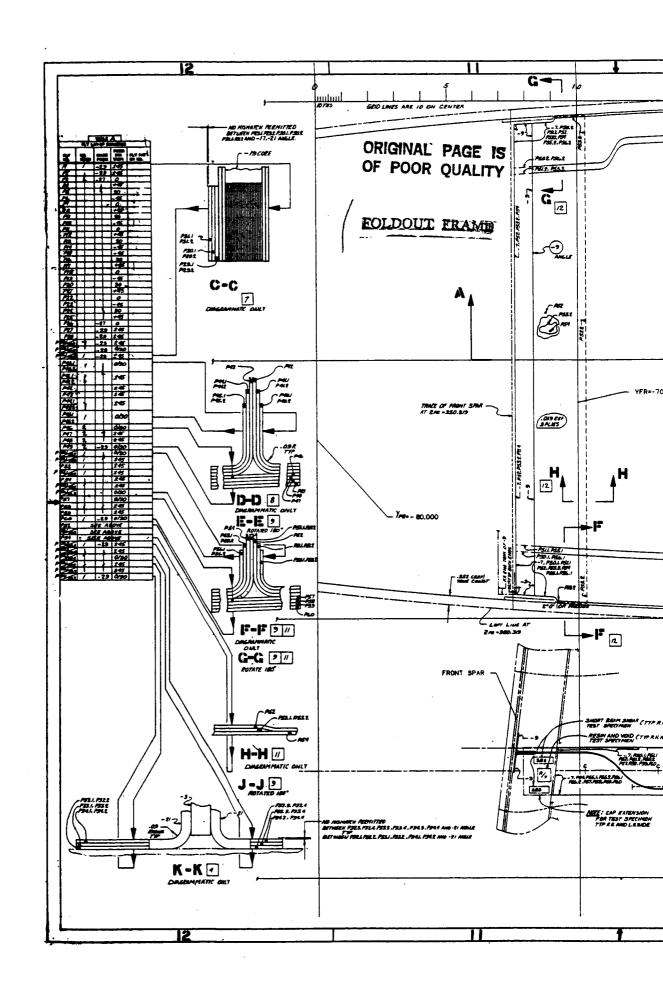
DRAWING AMC7859 - ZFR 350.319 RIB INSTALLATION (SHEET 1 OF 2)
